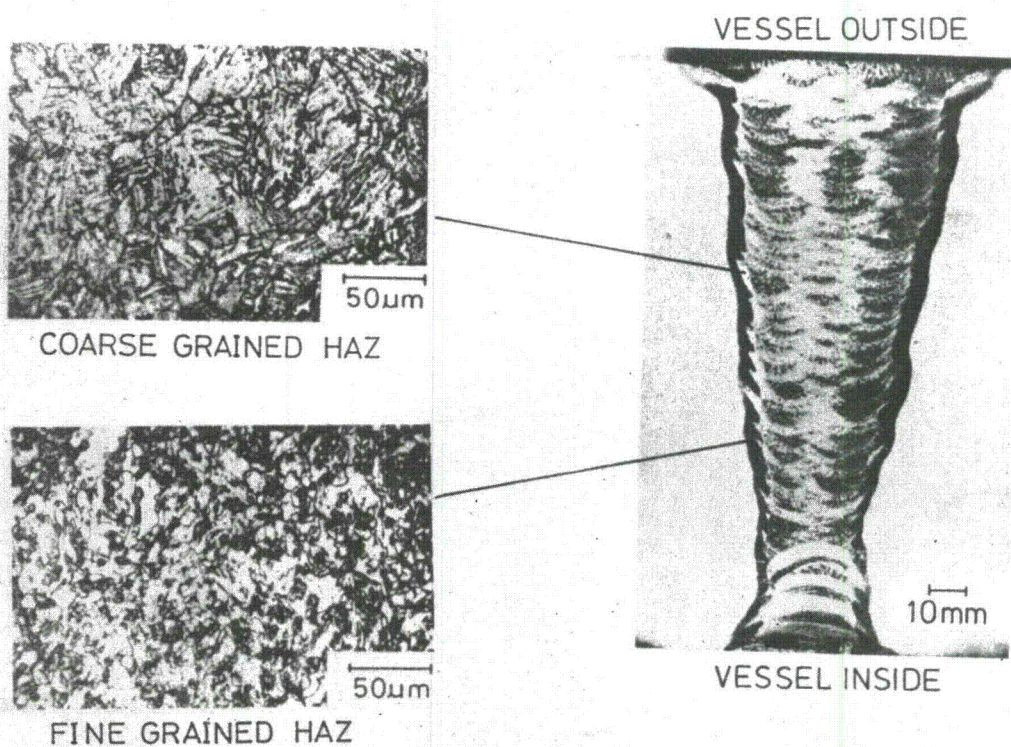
A macro-etch photograph of multi-pass submerged-arc weldment and typical weld HAZ microstructures.
